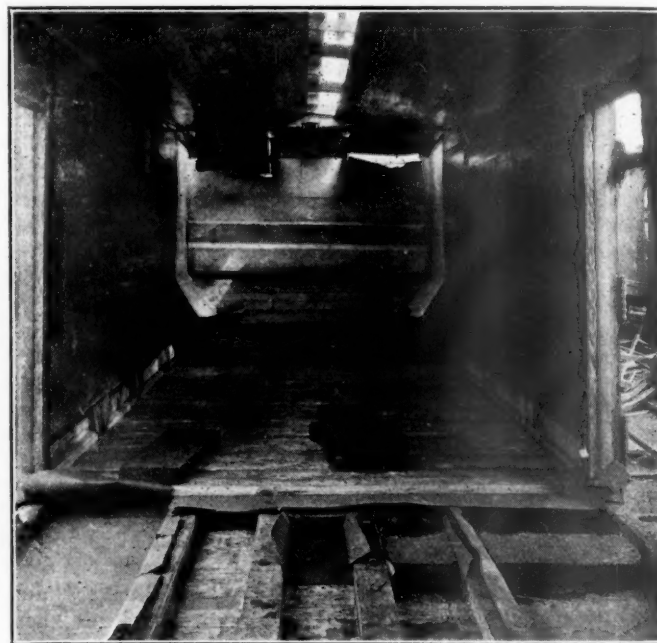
Method of Applying Insulation and Waterproofing in Floor
